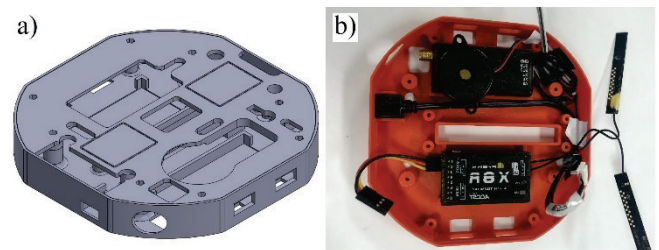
Avionics housing module: a) CAD model, b) 3D printed assembly
